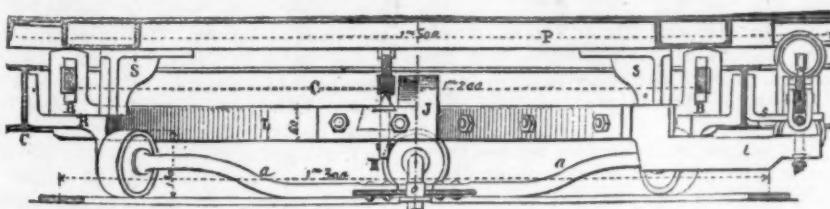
HALF LONGITUDINAL SECTION, AND HALF SECTION PASSING THROUGH THE POINT OF APPLICATION OF THE LOAD.
